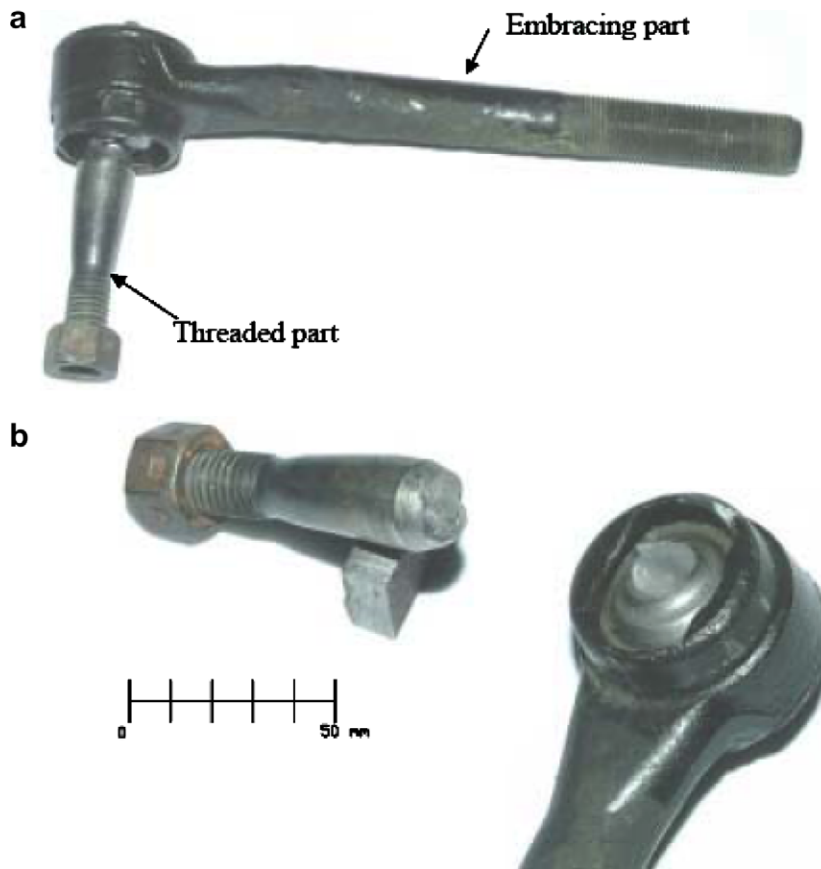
Parts of fractured tie rod end (a) assembled and (b) separated.
